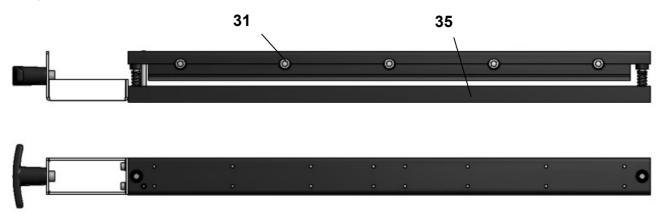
Creasing tool CITO 0.04" (571 40 467) – standard equipment. Creasing tool CITO 0.05" (571 40 468) as optional accessory.
